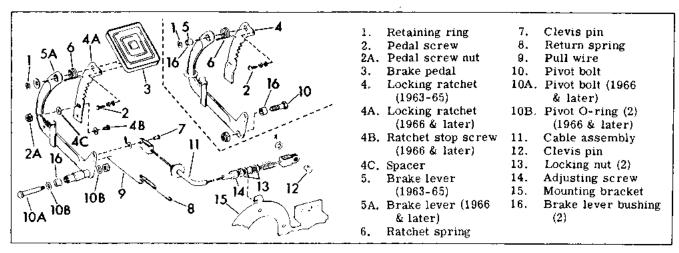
G-36. Brake Pedal and Cable - Exploded View (Mechanical Brake) ADJUSTING MECHANICAL BRAKE SHOES (Figure 2G-37)
